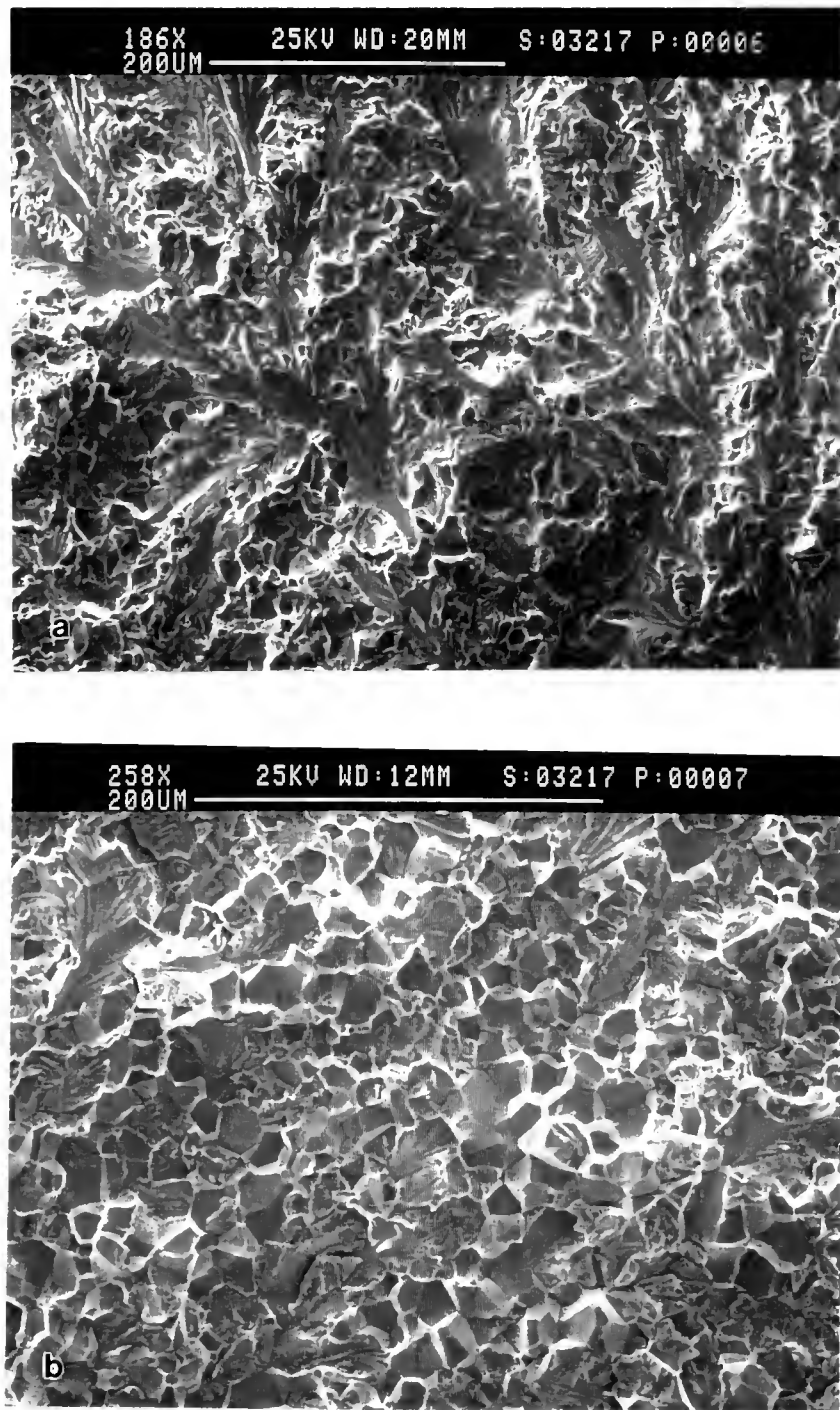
Fracture surfaces of NiAl-300C following tensile testing at room-temperature: (a) as-extruded and (b) after annealing at 1100 K for 2 h followed by furnace cooling.
